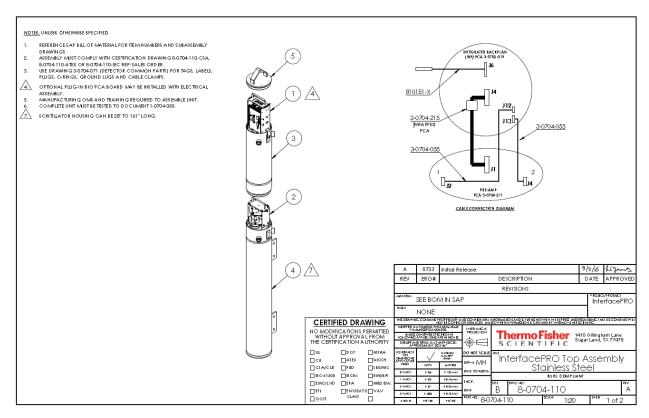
8-0704-110: Top Assembly, InterfacePRO (Sheet 1 of 2)
